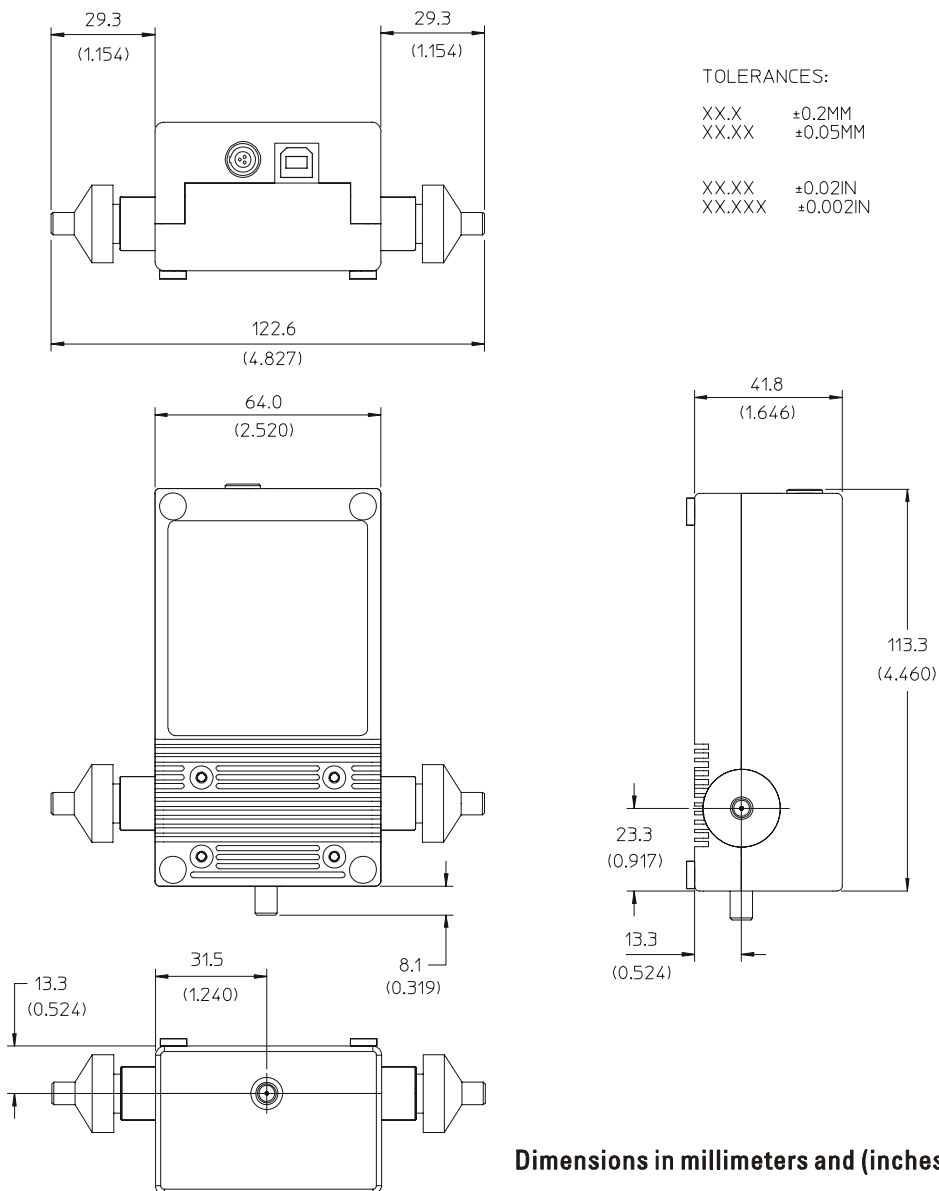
Mechanical Dimension of U9391C Comb Generator
